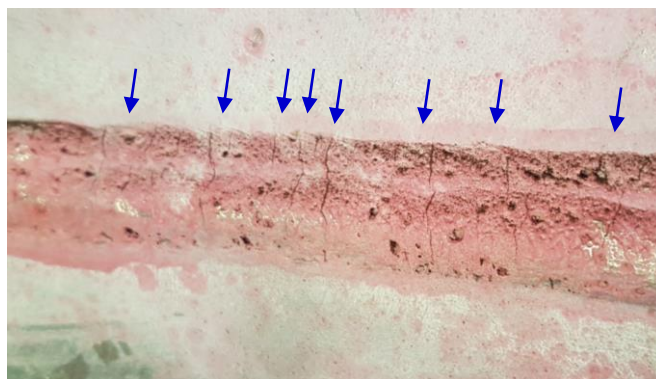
Condition of the welded joint with tiny cracks, perpendicular to weld direction.
